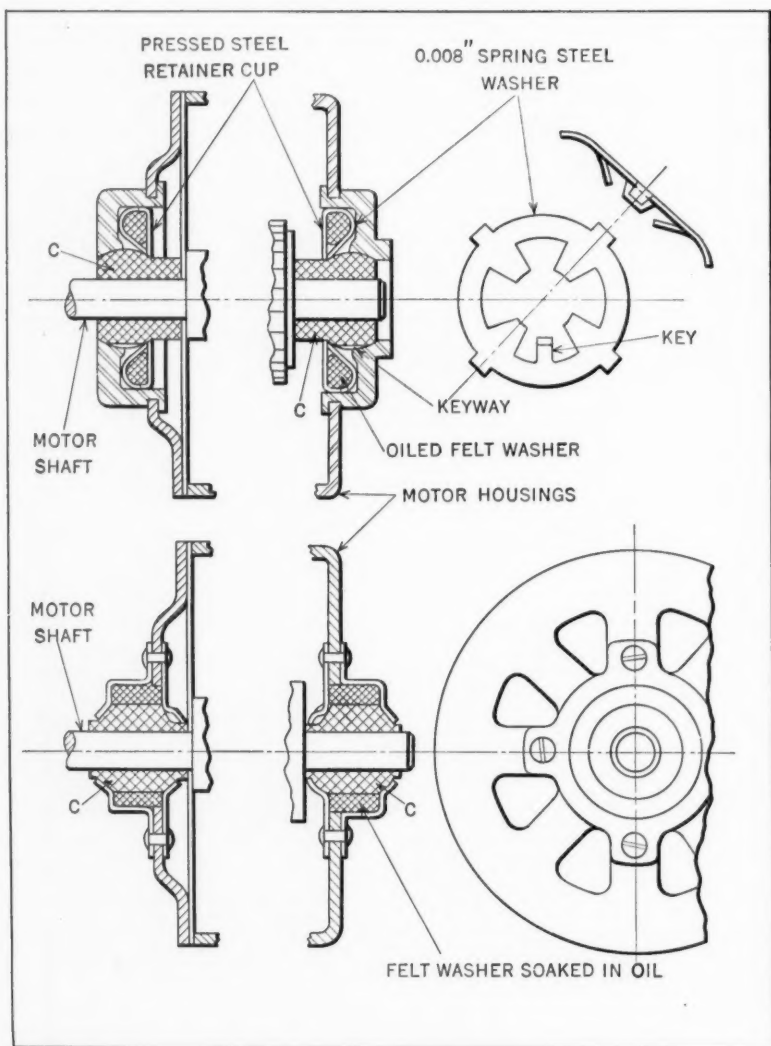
Cross-sections of Two Small Electric Motor Bearings, Showing How Compo Porous Bronze Bushings C are Fastened to the Pressed-steel Frames
